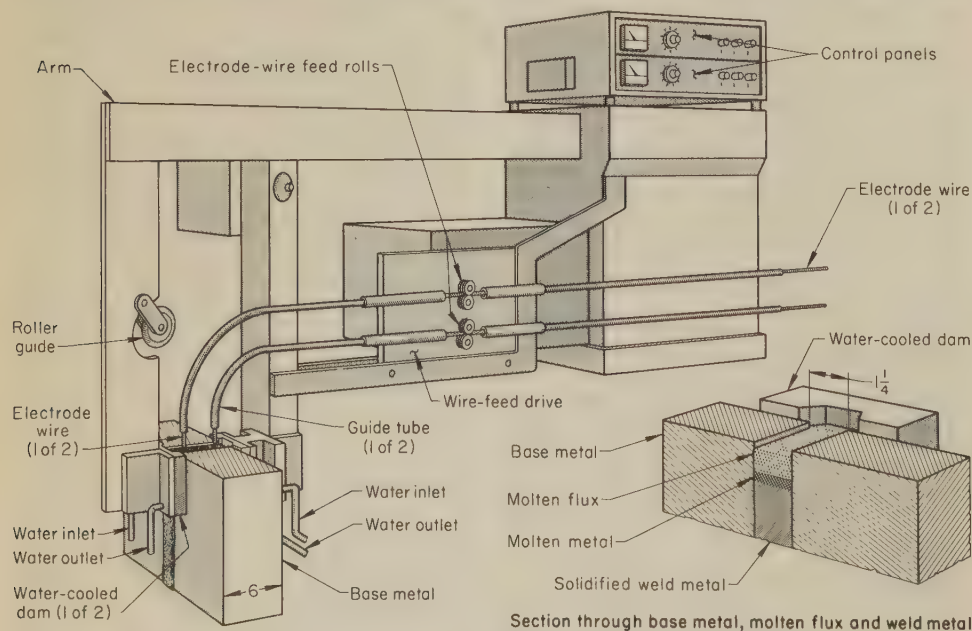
Principal components and setup of equipment for conventional electroslog welding. The mechanism for providing vertical movement of the welding machine is not shown.
